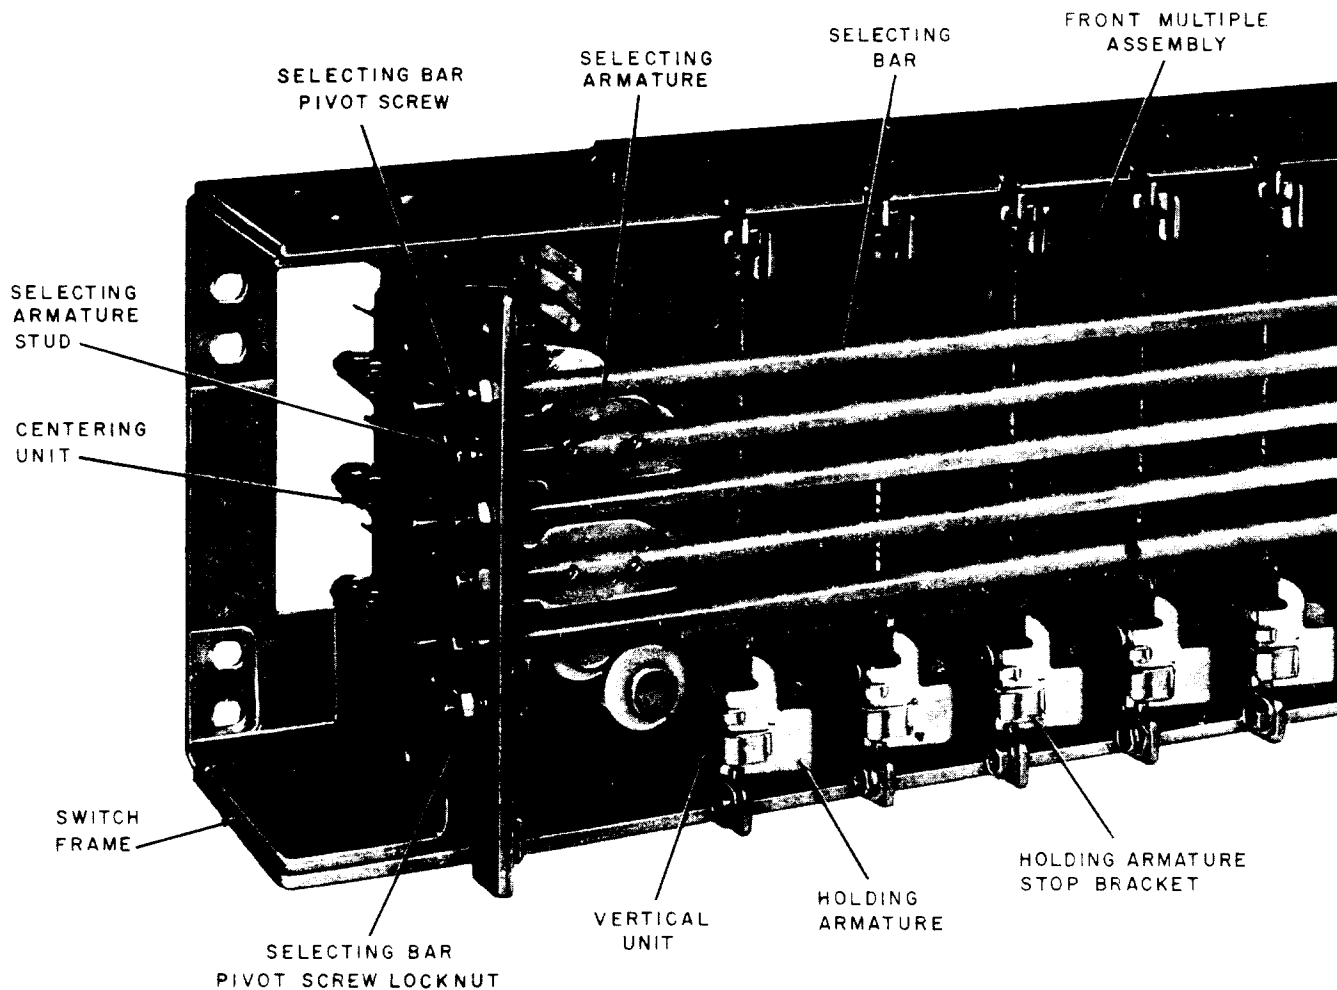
Front View of Switch With Bottom Selecting Bar Assembly Removed
